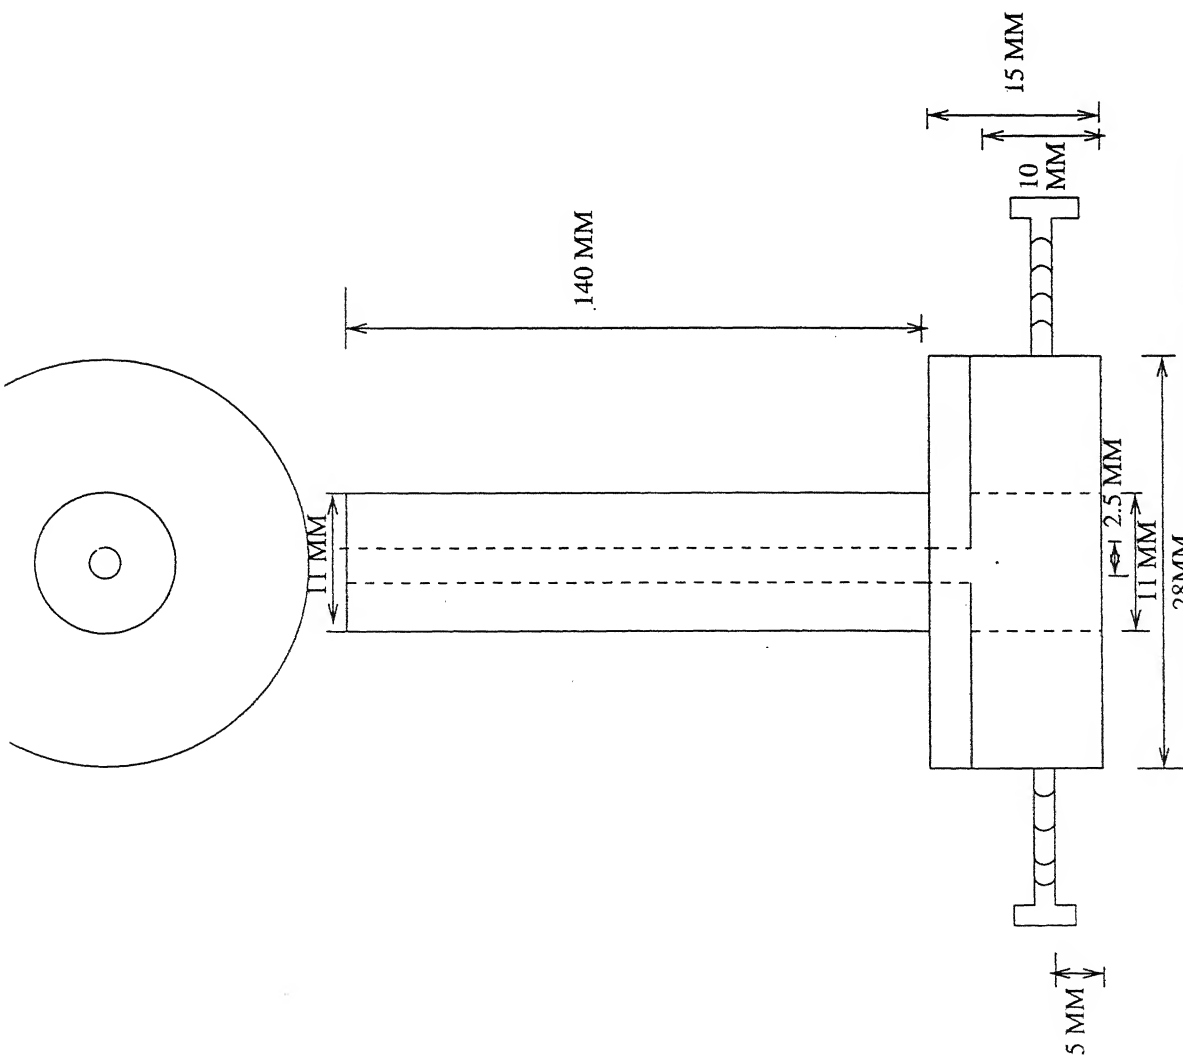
Brass Holder to Hold Teflon Sample Holder
